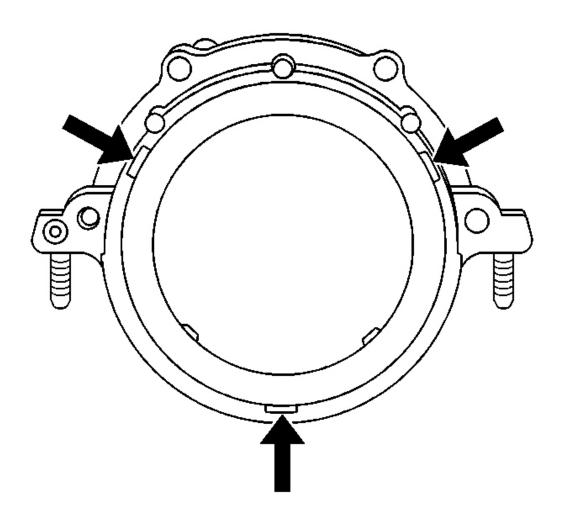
Crankshaft Rear Oil Seal Notches Courtesy of GENERAL MOTORS CORP.
